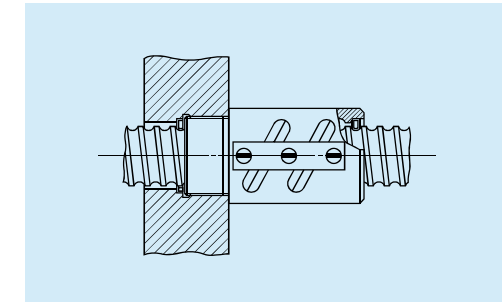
Installation of brush-seal to a ball nut with thread screw
